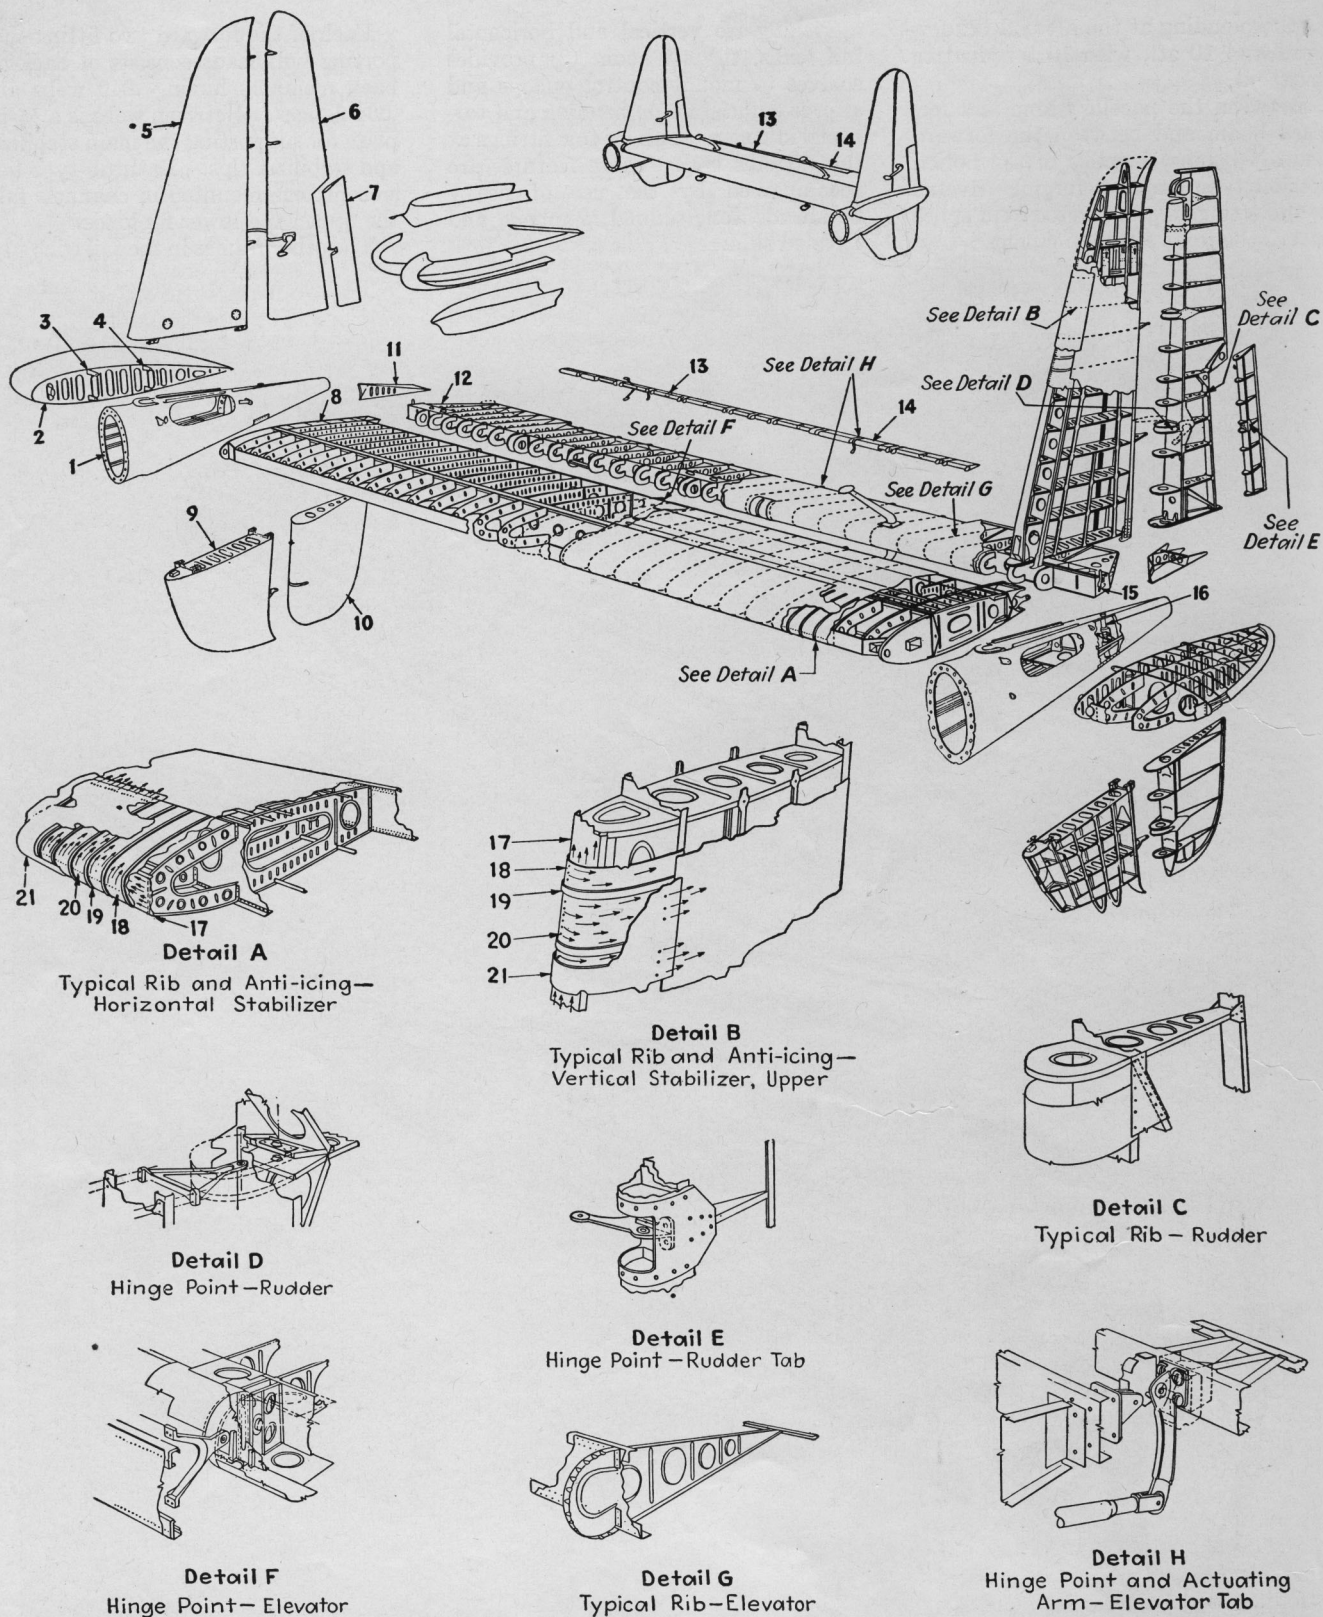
Structural details of the tail group; (1) aft boom; (2) stabilizer tip; (3) front spar fitting; (4) rear spar fitting; (5) upper fin; (6) upper rudder; (7) rudder tab; (8) stabilizer; (9) lower fin; (10) lower rudder; (11) clearance piece for rudder throw; (12) elevator; (13) spring tab; (14) trim tab; (15) elevator horn; (16) rudder torque tube; (17) spanwise baffle; (18) inner skin; (19) spacer between inner and outer skins; (20) hot-air inlet; (21) outer skin.
